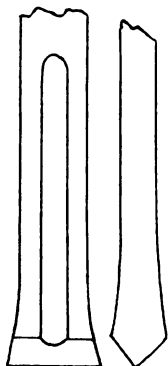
MAKES YOU THINK OF A WELL DRILLING BIT
